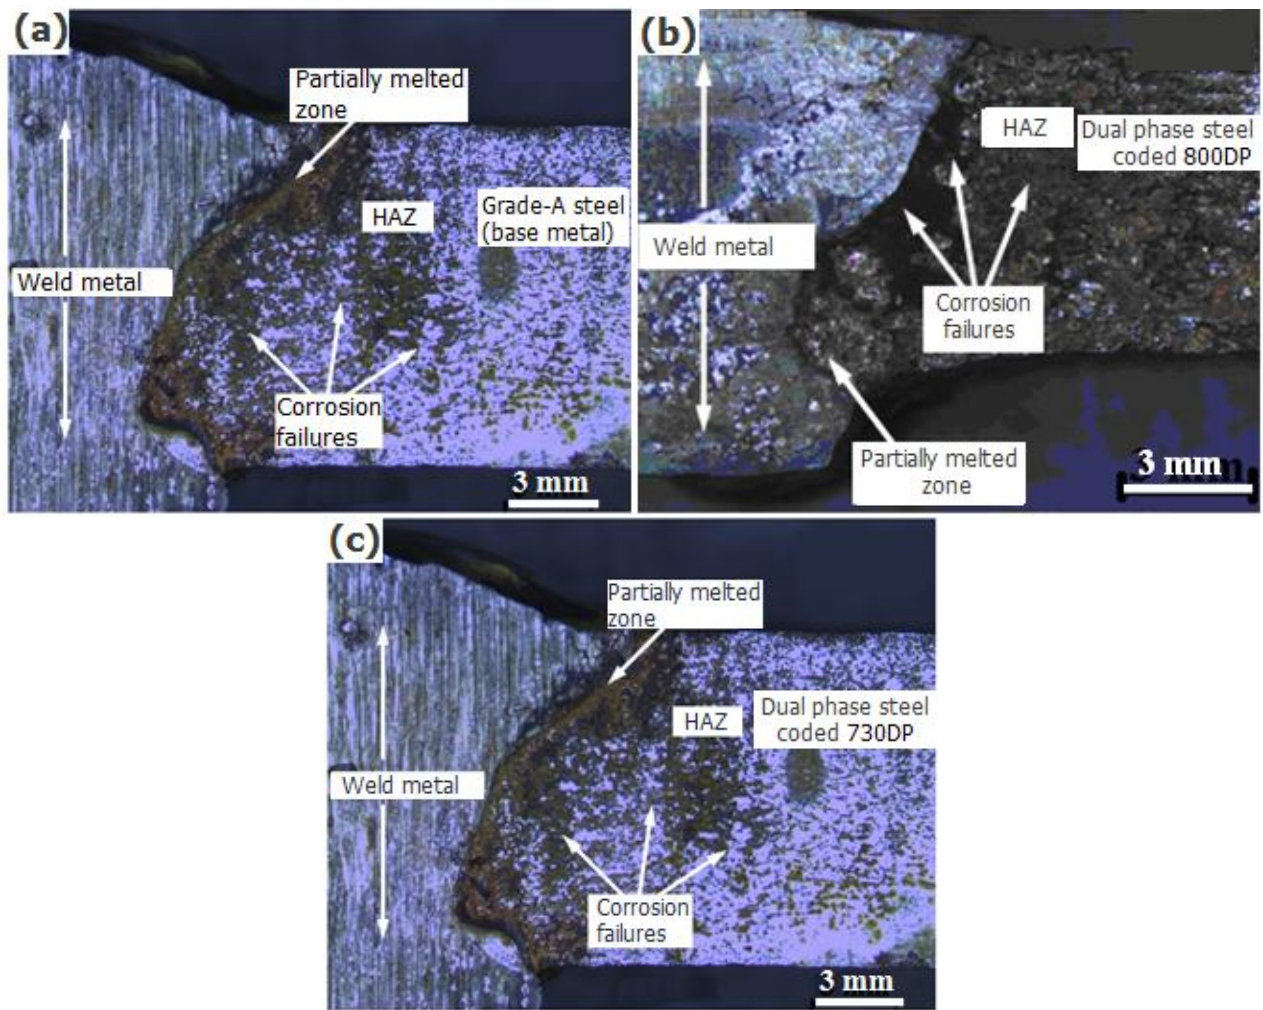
Macrostructures of weld region of Grade-A and dual-phase steels welded by FCAW after 90 days immersion corrosion test in 3.5% NaCl solution; (a) Grade-A steel joint, (b) dual-phase steel joint coded 800DP and (c) dual-phase steel joint coded 730DP.
